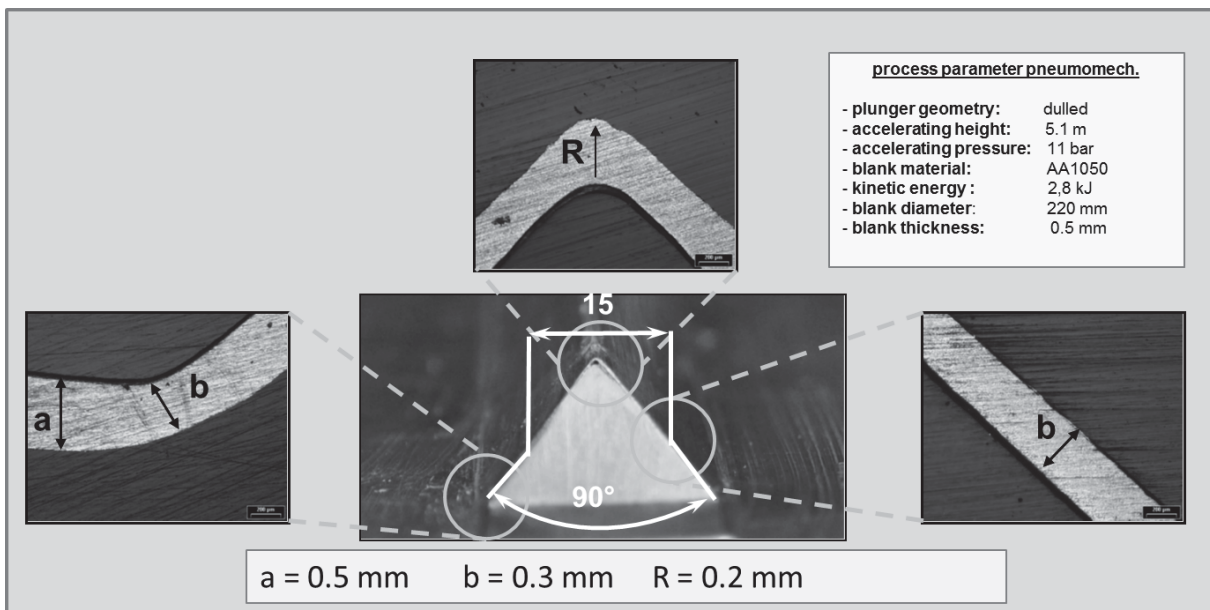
Forming strongly contoured workpieces by the pneumomechanical forming process
